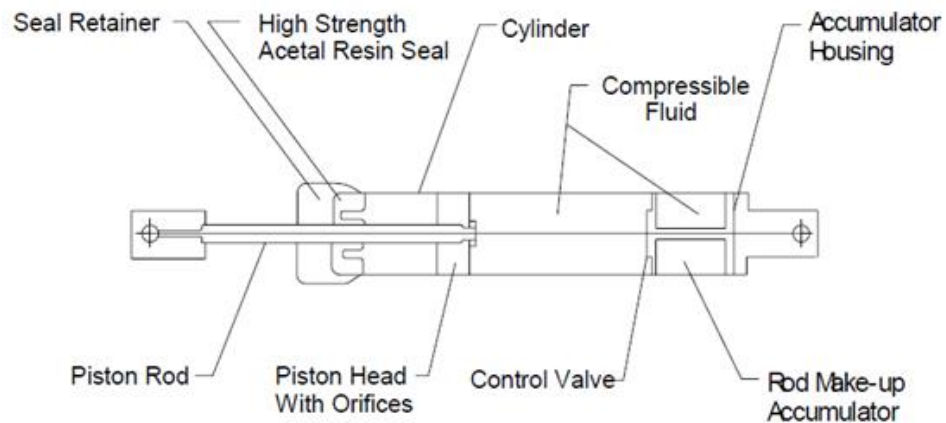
Fluid Viscous Damper Schematic Drawing
